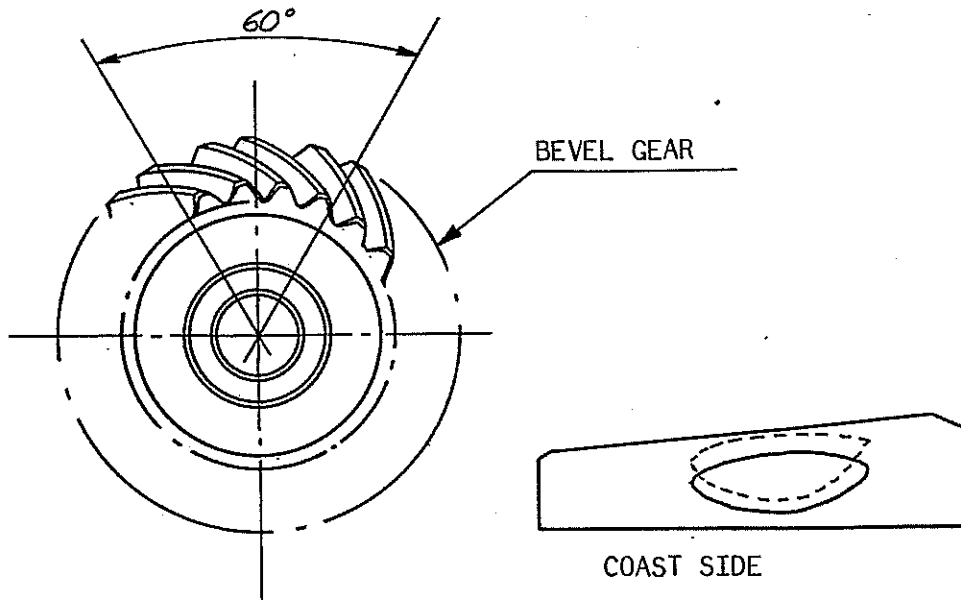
90° Gear Box Bevel Gear - Detail of Coast Side imprints
